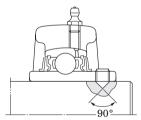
Drilled seat provided for shaft (for improvement in set screw tightening effect) For use with Cone Point setscrews
